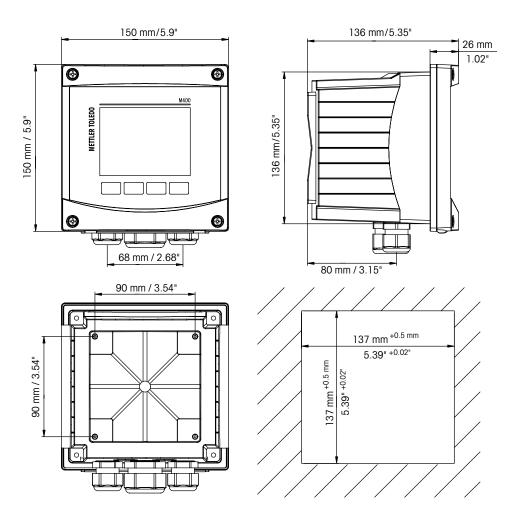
Dimensions ½ DIN version (bottom right: dimensions for panel cutout).
